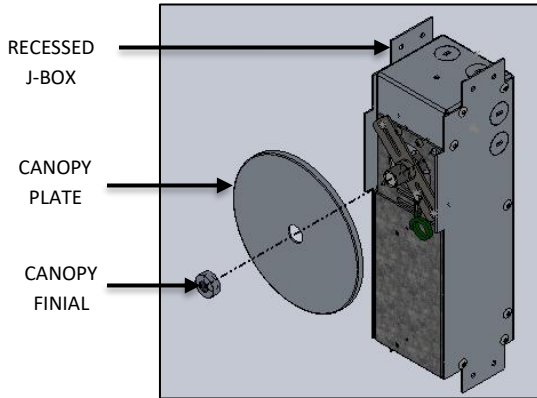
FINIAL AND CANOPY DISASSEMBLY
